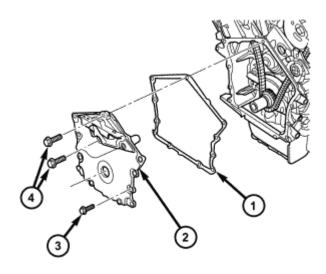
View Of Timing Chain Cover, Bolts & Gasket Courtesy of CHRYSLER LLC
